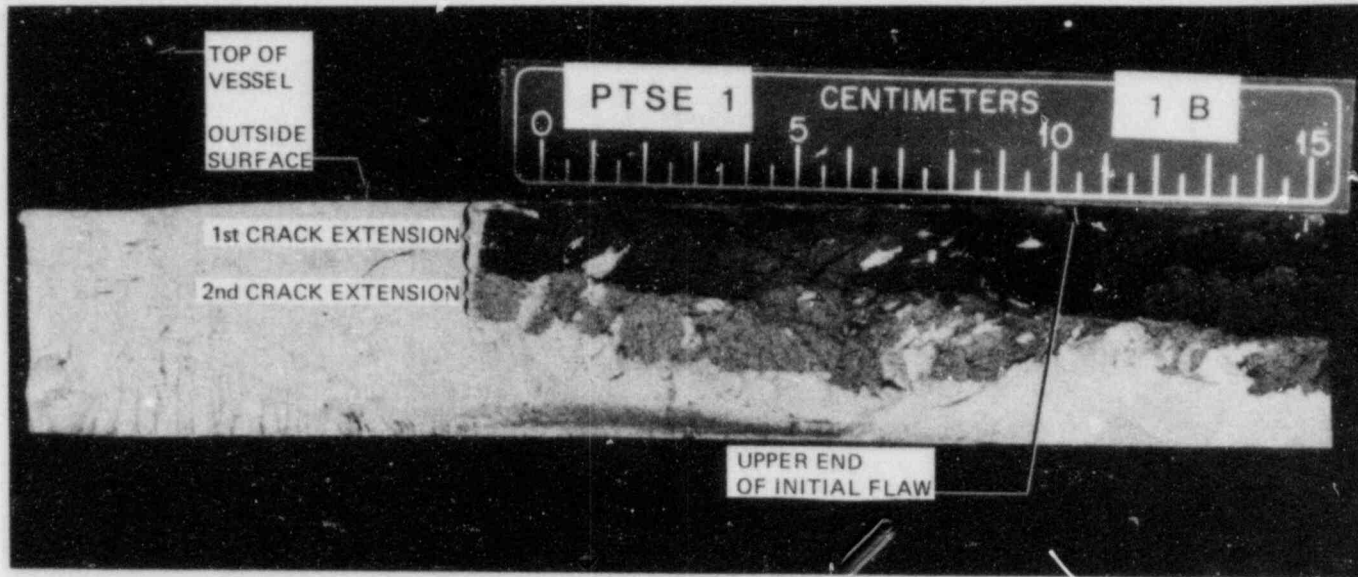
Fracture surface B of segment 1 of PTSE-1 flaw showing axial extension at upper end of flaw. (See Fig. 10.3 for key to location.)
